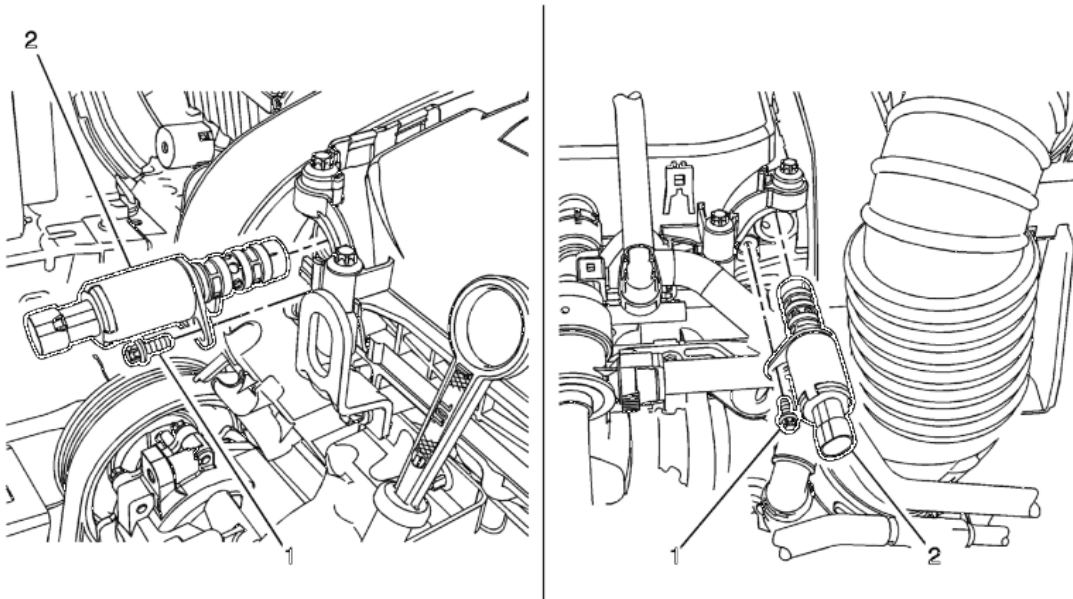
Camshaft Position Actuator Solenoid Valve & Bolt
